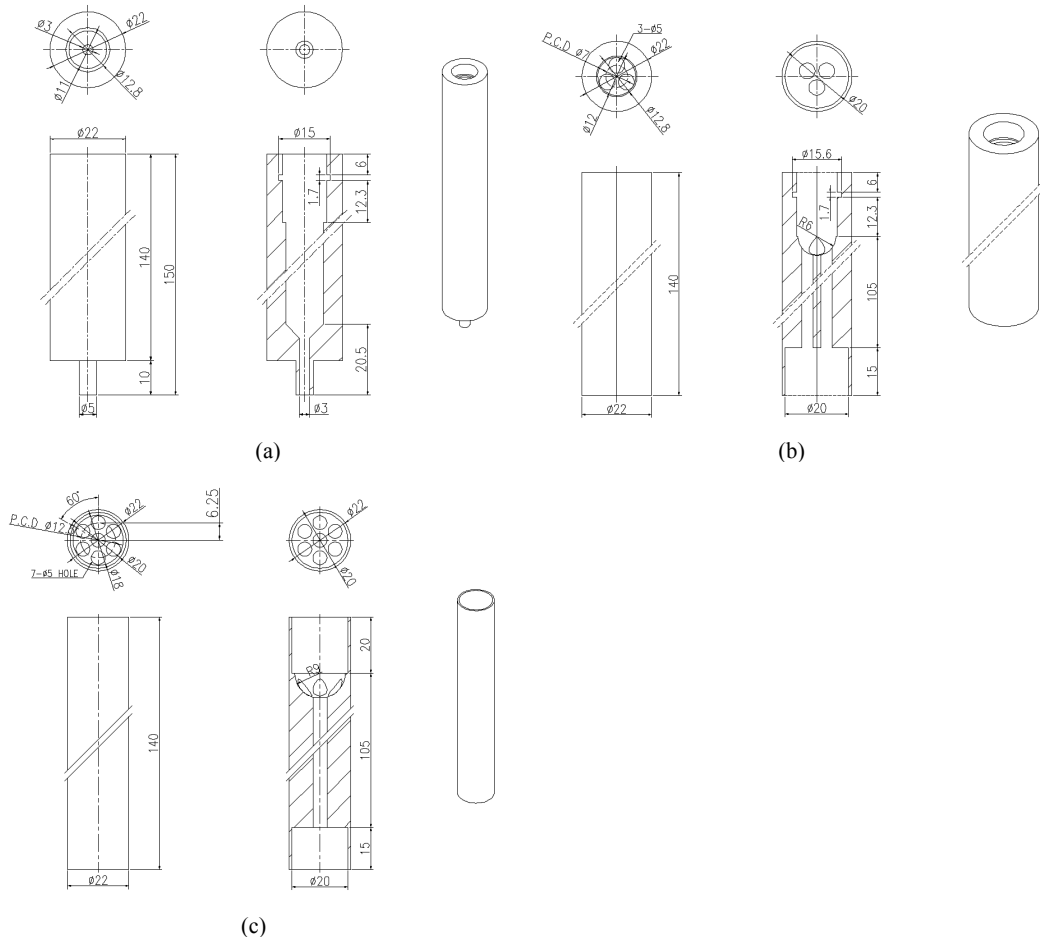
Design of the drying systems using a heating method : (a) A (1 hole), (b) B (3 holes), and (c) C (7 holes)
